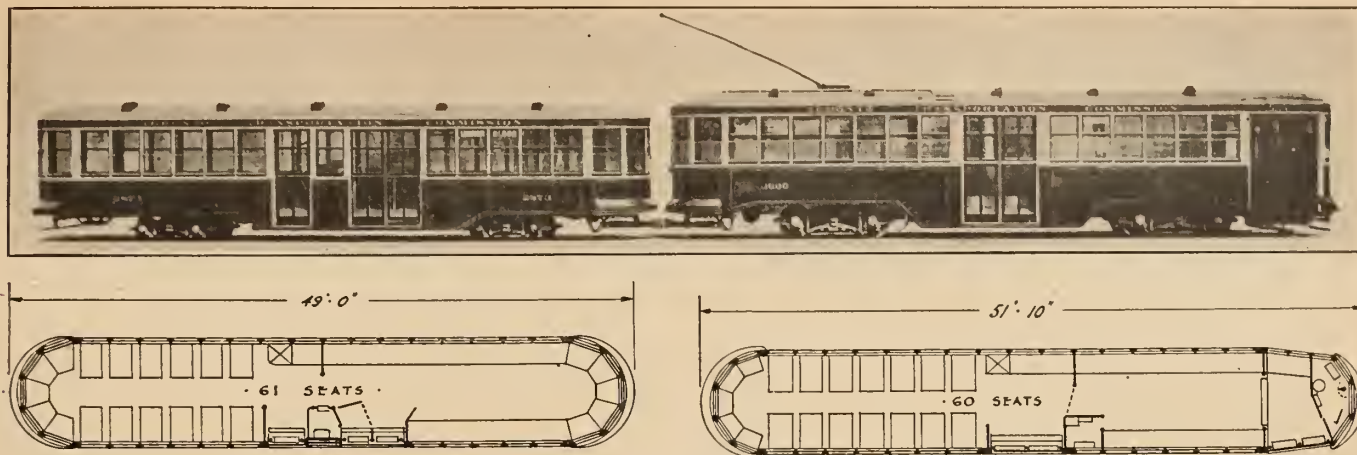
, — Elevation and Floor Plan of Witt Motor Car with Three-Door Trailer, Toronto — 1922.
